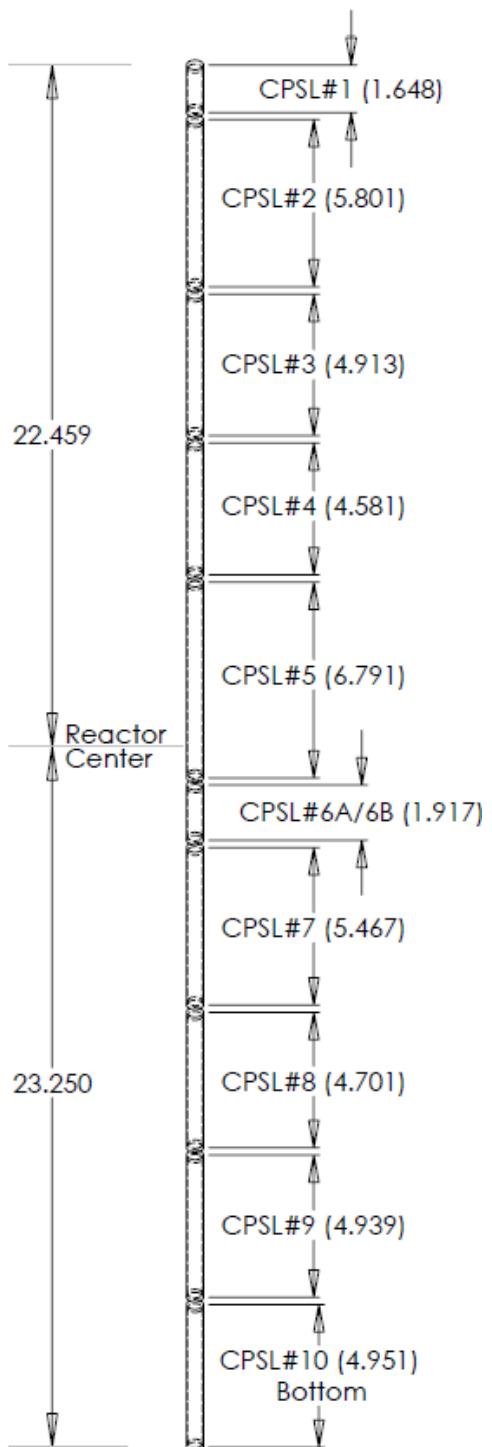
Capsule assembly schematic (lengths are in inches) [1].
